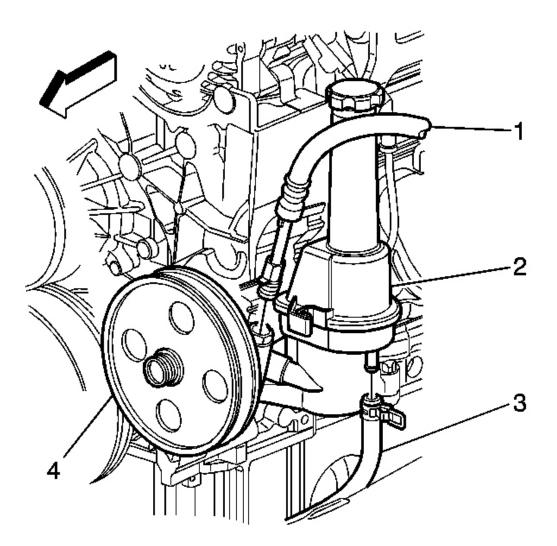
View Of Power Steering Pressure Hose, Return Hose & Pump Courtesy of GENERAL MOTORS CORP.
